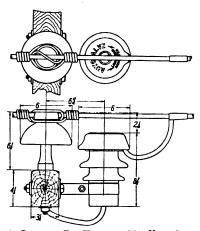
Side and Top Views of 7500-Volt Arrester with Form H Mounting Bracket
